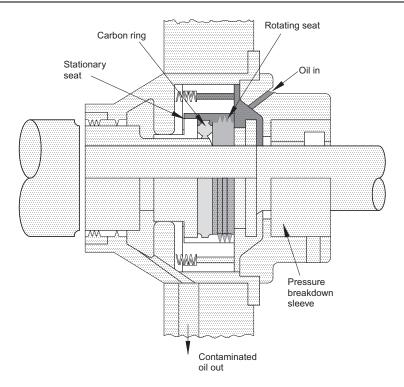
Cutaway of a mechanical seal illustrating the vertical contact between the carbon ring, rotating and stationary seals.
